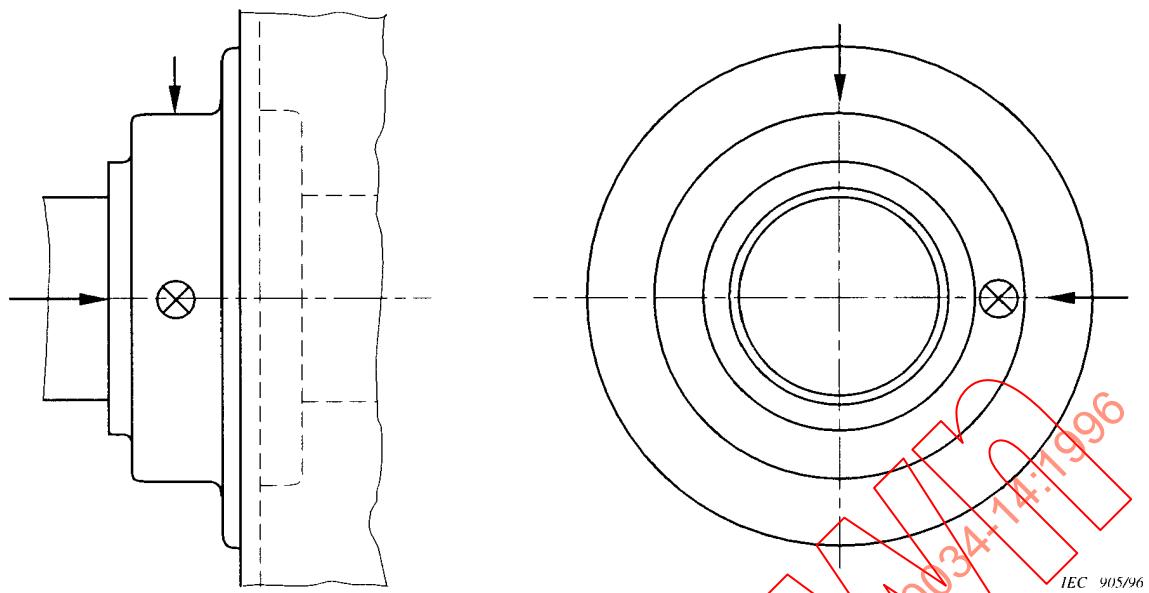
Preferred points of measurement applicable to one or both ends of the machine
